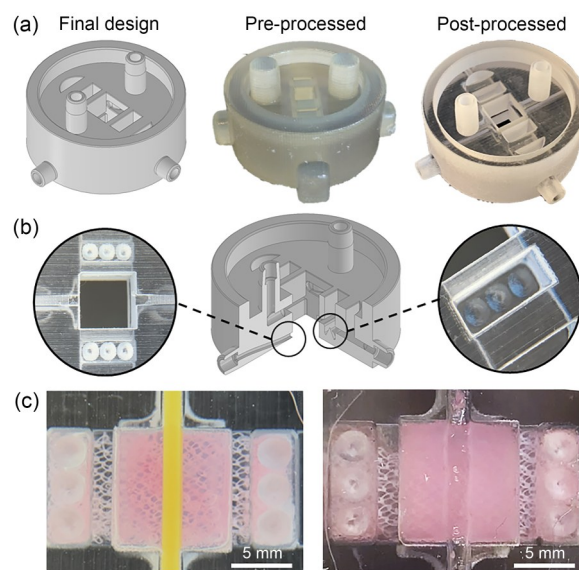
Illustrations of the AoC fabrication: (a) fabrication process; (b) major fabrication defects; (c) images showing the lumen casting process after the full assembly of the AoC
